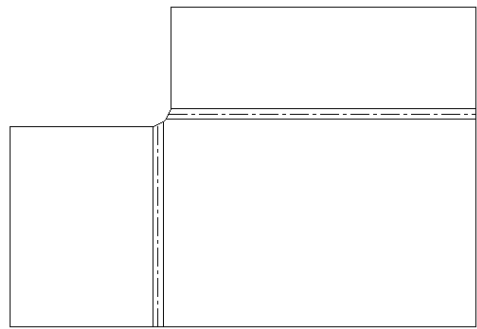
Flat pattern with the Merge faces check box cleared
